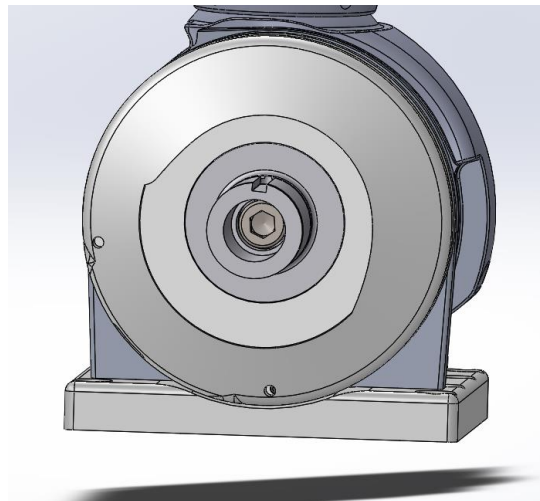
The bottom shaft is secured to the actuator with a screw
